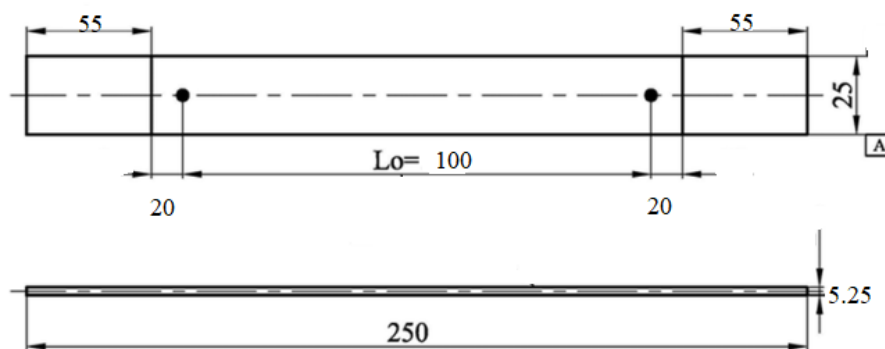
Technical mixtures (mwcnts)/Epoxy
